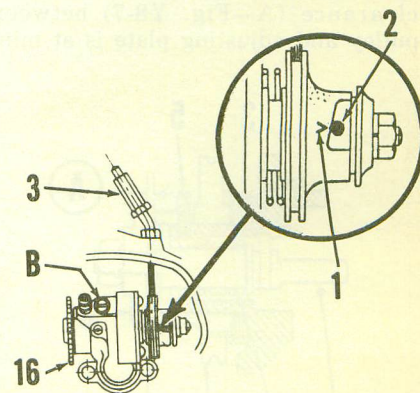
When carburetor controls are correctly adjusted and engine is at idle speed, mark (1) should be aligned with guide pin (2). Cable adjuster is shown at (3).
